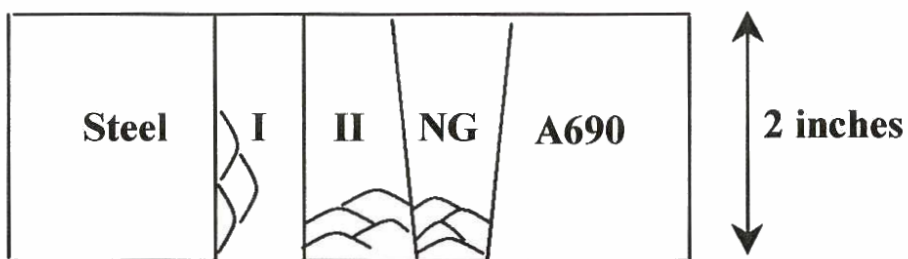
Schematic drawing of the weldment investigated by EBSD. The joint consisted of two types of Alloy 82 buttering (I and II) and a narrow-gap weld (NG) for joining a low carbon steel plate to an Alloy 690 plate (Young et al. 2003).
